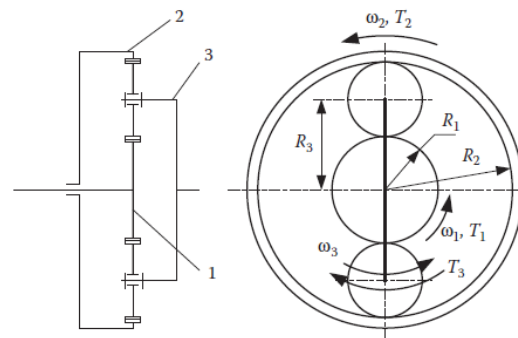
Schematic of a Planetary Gearset Used as a Speed Coupler [18]
